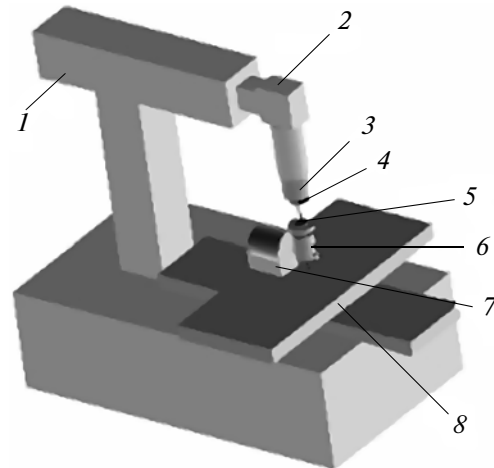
Schematic of the experimental test bench: (1) laser; (2) optical unit; (3) movable carriage; (4) lens; (5) component; (6) rotary actuator; (7) rotator; (8) desktop.
